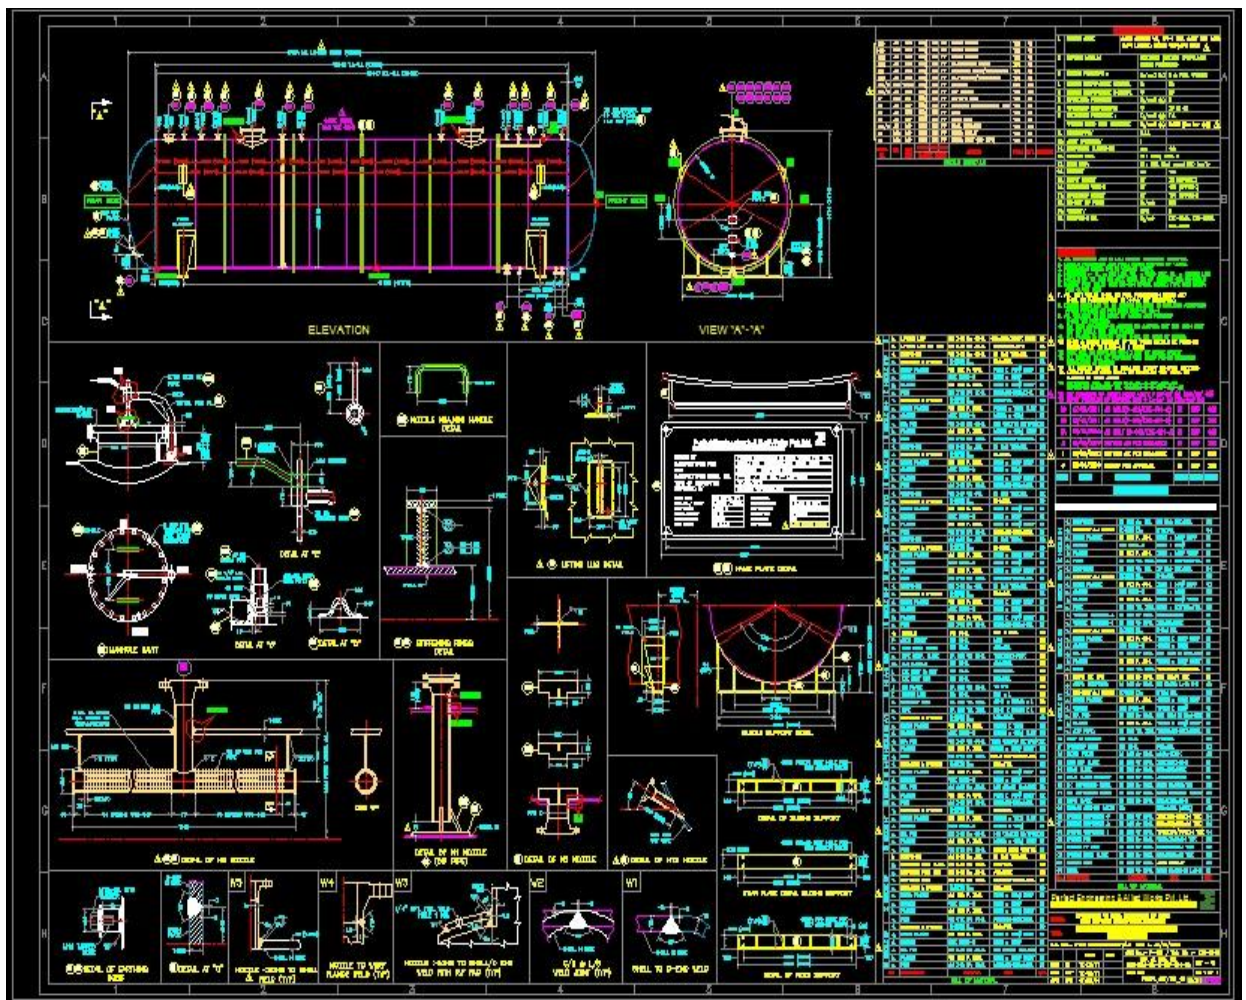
Isrosene Storage Tank, Fabrication Drawing
